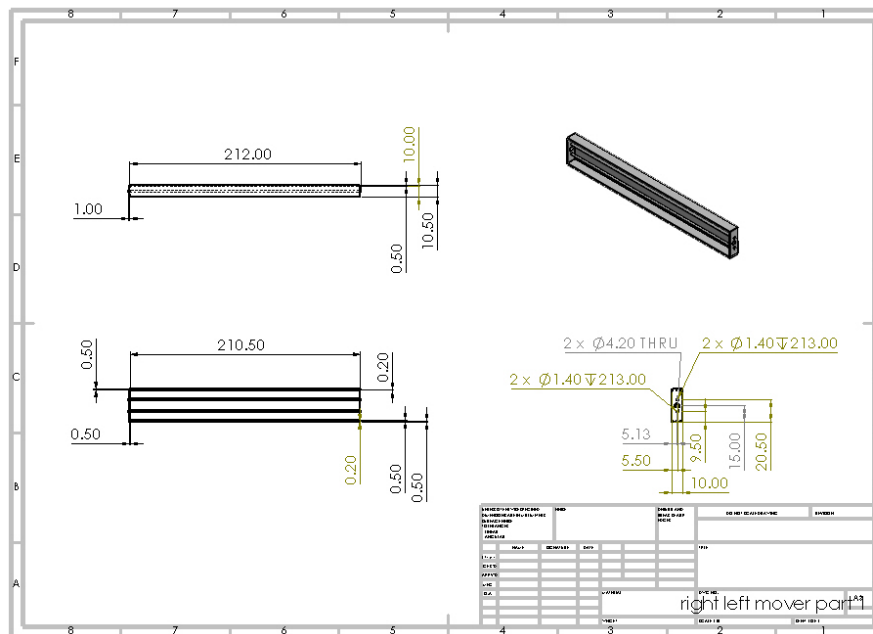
Engineering Drawing – Horizontal Actuator Roof
